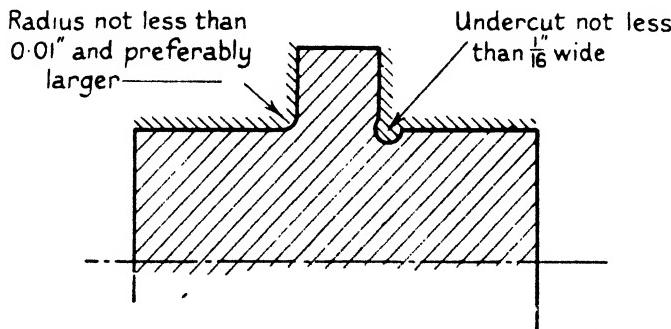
ALTERNATIVE CORNERS FOR GROUNDED PARTS
